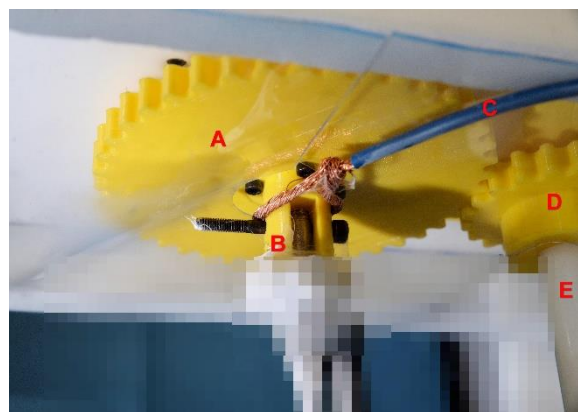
Upper Gears. A) Main gear. B) Socket for the grip. C) Copper ground wire. D) Shaft Gear. E) Shaft
